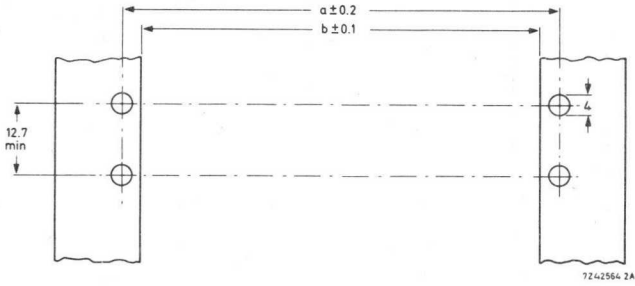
Rail mounting; for dimensions a and b, see Table 2.
